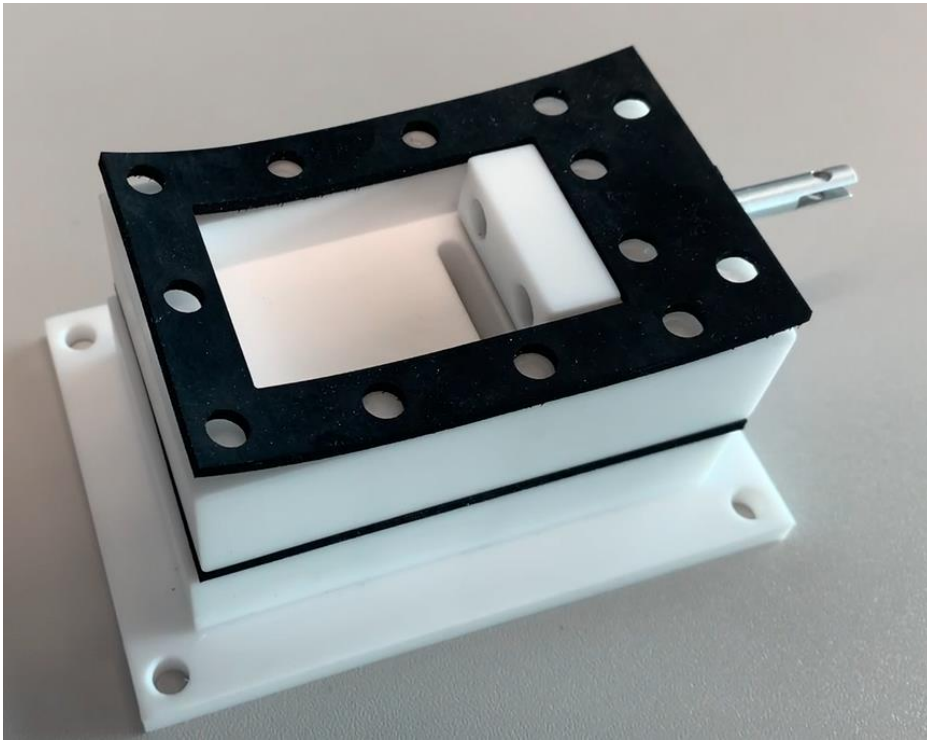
Prototype condensing engine slide valve shown with top piece removed and slide piece in 'valve open' position.
